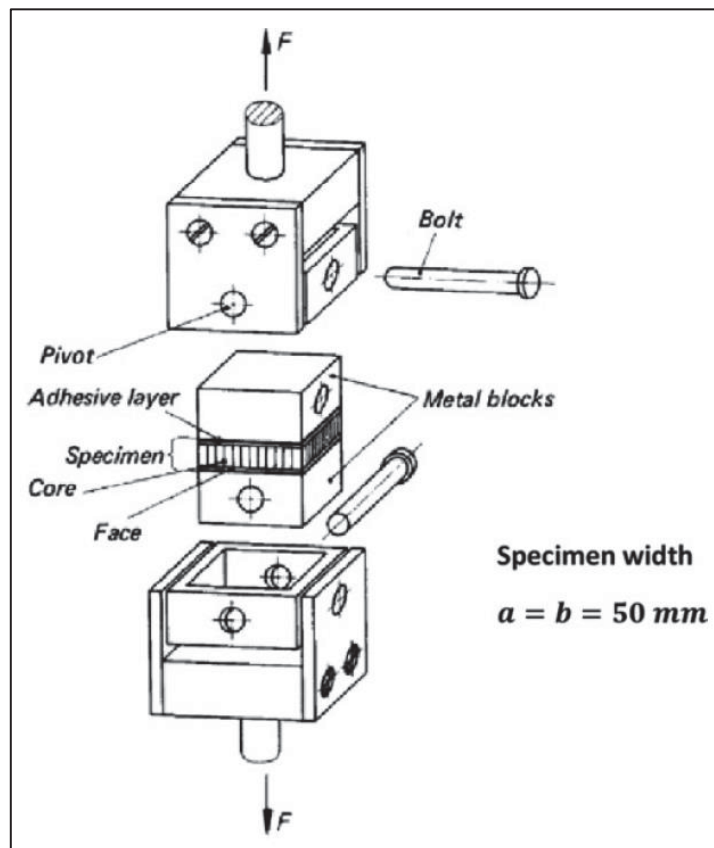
Flatwise tensile testing setup after DIN53292
